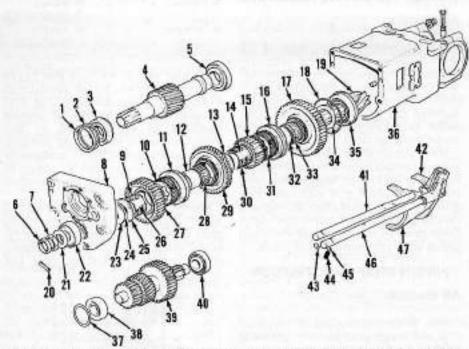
Exploded view of power shift transmission showing component parts and their relative positions.
